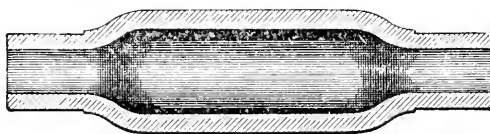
A Shaft or Roll designed on the principle of a girder.
